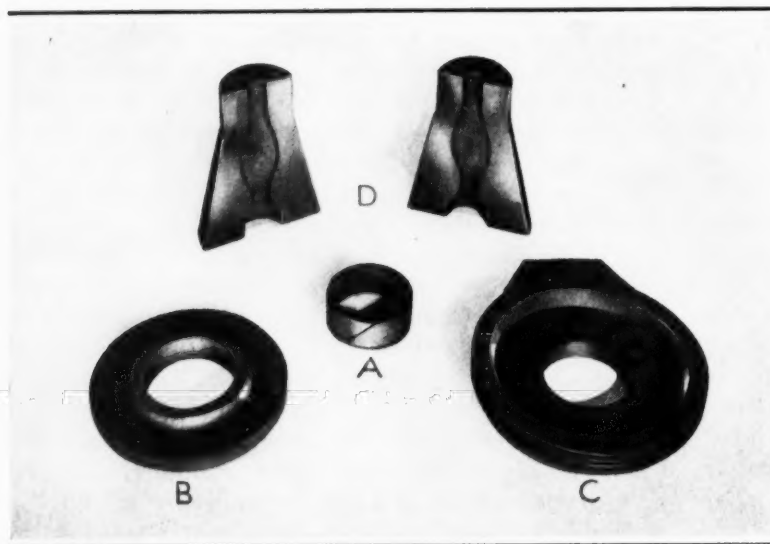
The Die Parts for Die-casting the Pipe Flange B Consist of Two Split Gate Members D, Two Cast-iron Die-blocks C, a Collapsible Core A, and Two Steel Inserts (Not Shown)
